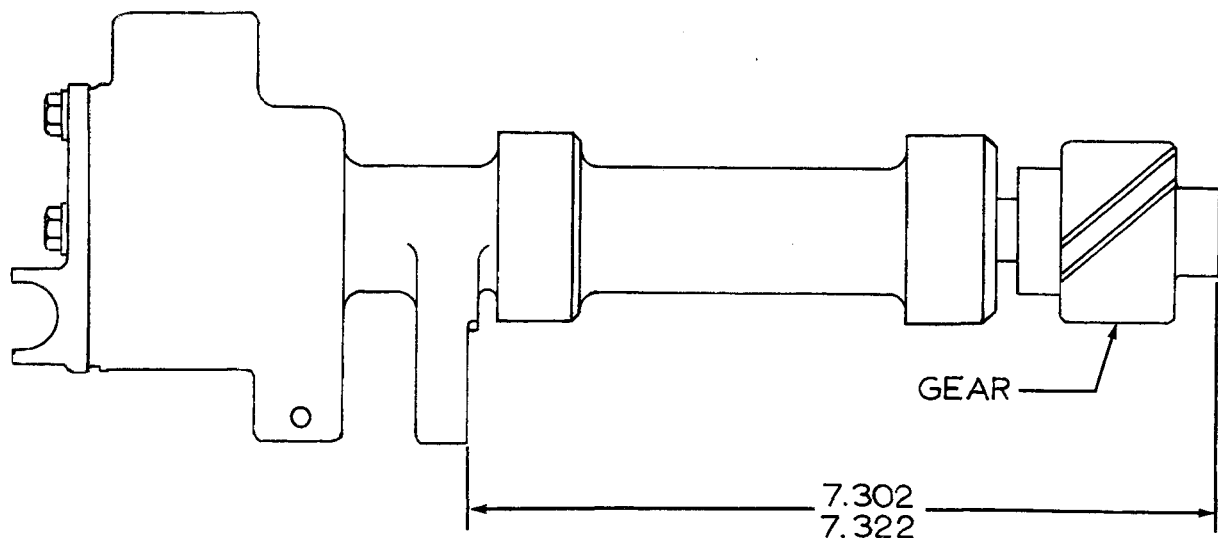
PUMP MOUNTING SURFACE-TO-GEAR RELATIONSHIP
